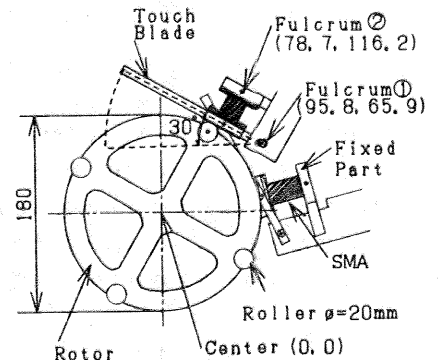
Actual sizes of driving parts and rotary parts of a heat engine
